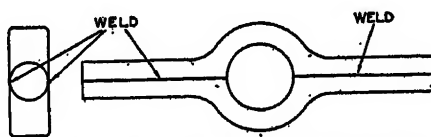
Type of butt welds made on automobile rear-axle housings
